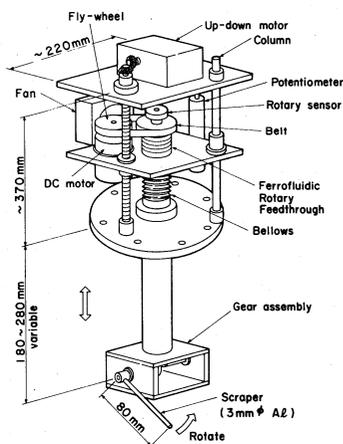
The fast rotary beam scraper installed in the booster synchrotron.
